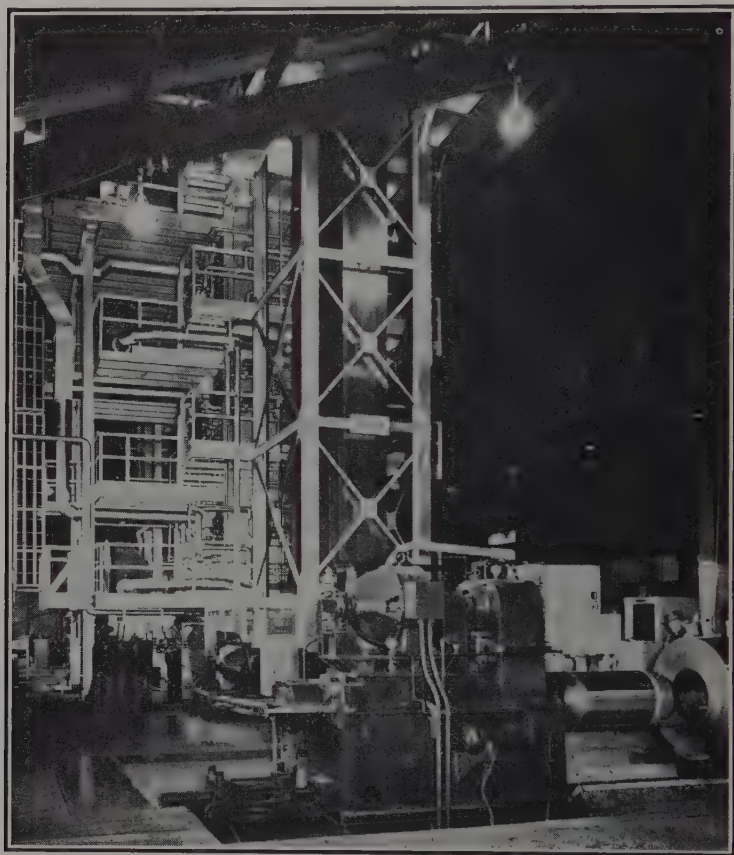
Tower furnace for continuous annealing of strip. Courtesy of the Drever Co.
